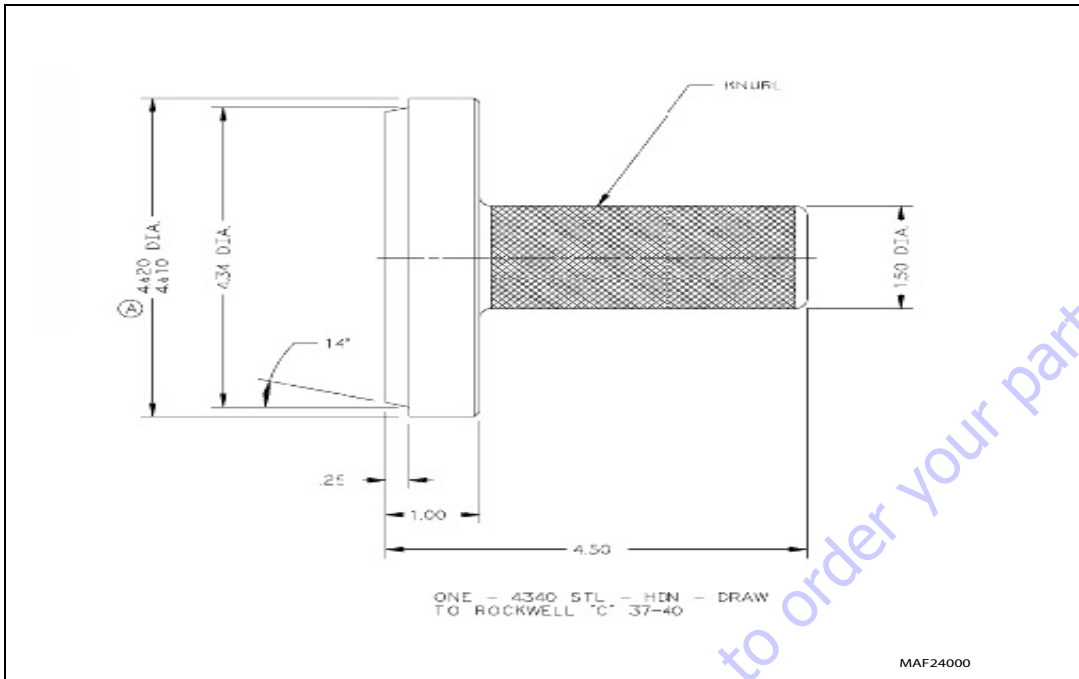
Bearing Cup Pressing Tool (T149013)
